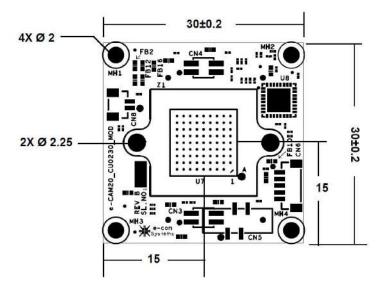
NileCAM20_CUNX Camera Module Board Front View
